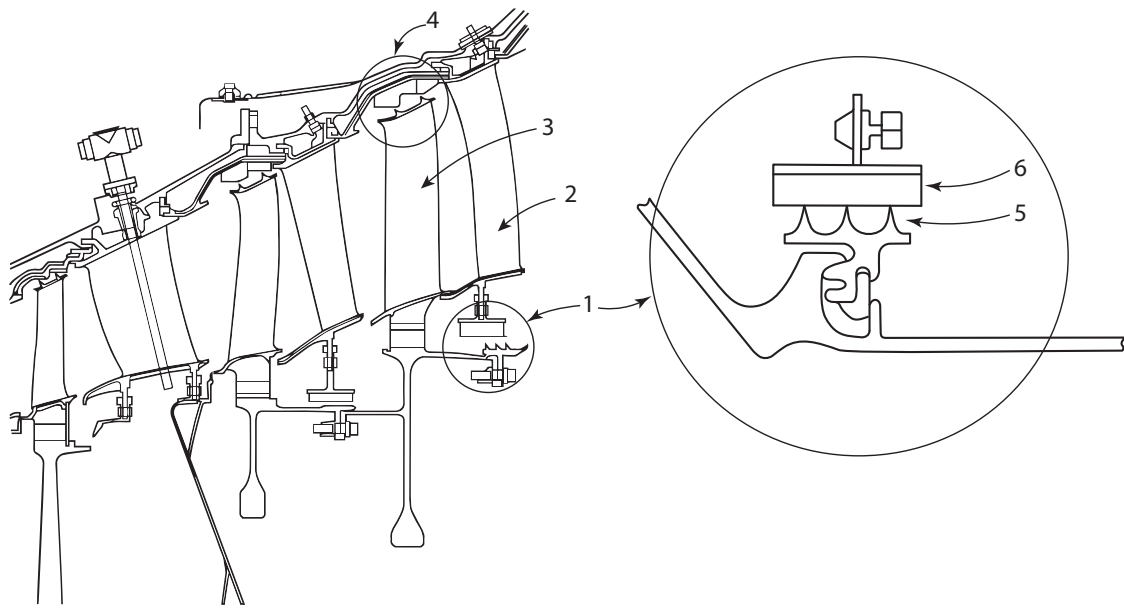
Side cross-section of a gas turbine engine. Labels: (1) Interstage seal arrangement; (2) Static/Stator Vane; (3) Rotor Blade; (4) Seal arrangement on rotating blade; (5) Fin on rotating component; (6) Abradable lining on stator. Extracted and adapted from Piggott *et al.* [15] (left) and Raper [2] (right)
